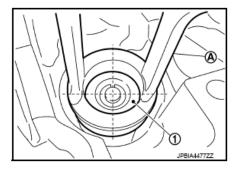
Pressing Center Of Valve Spring Retainer Courtesy of NISSAN NORTH AMERICA, INC.
